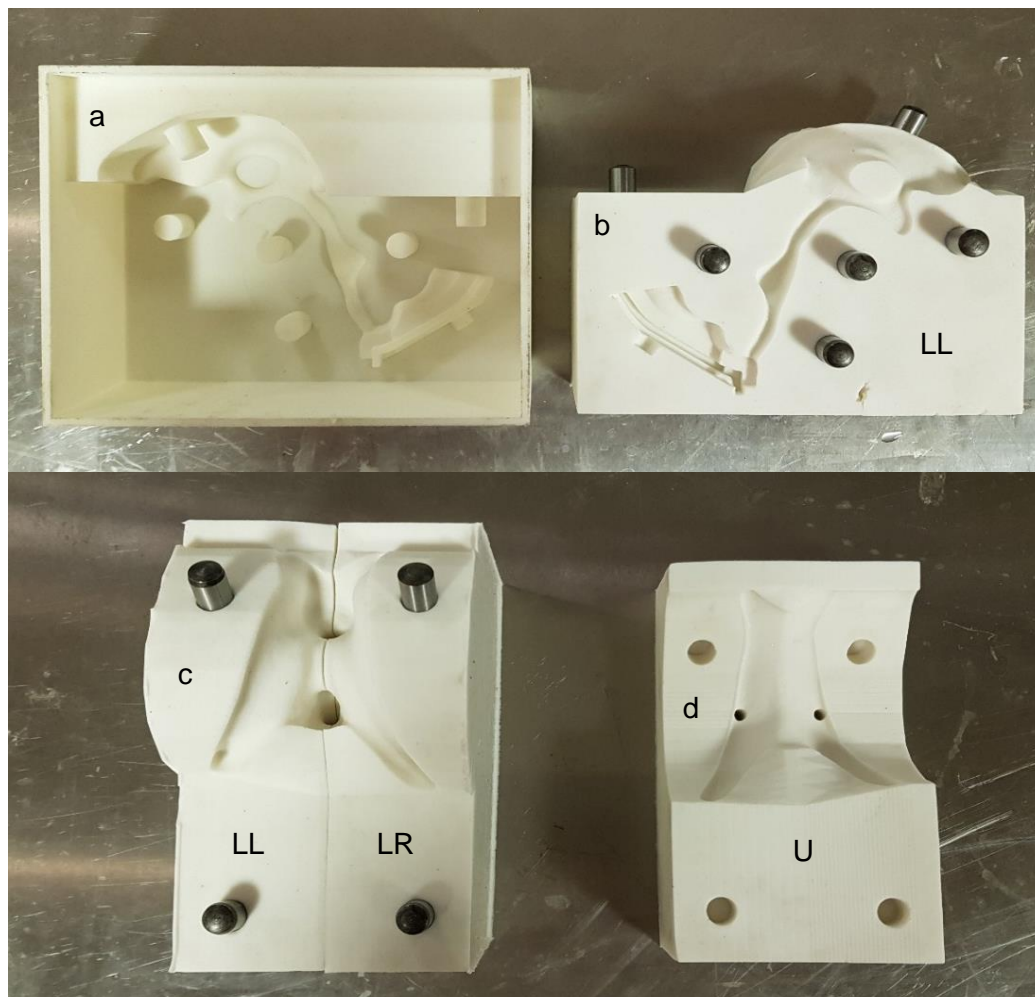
Fabricating the negative silicone ventricle mould. a) fabricated positive mould for the production of the LL section of the silicone negative mould; b) silicone cast LL section with locating dowel pins inserted; c) birds eye view of LL and LR sections assembled; d) U section.
